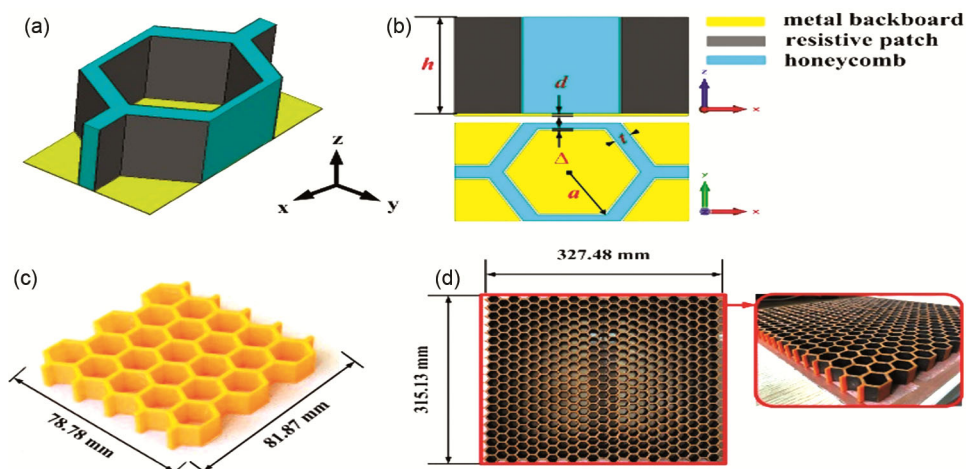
Metamaterial absorber using 3D printing (a) Design overview, (b) Design parameters, (c) 3D-printed honeycomb structure using PLA and (d) Fabricated absorber⁴⁹.
